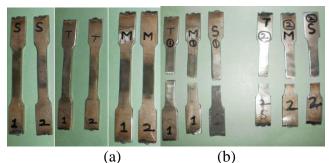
Tensile Specimens before Chemical exposure a) Sample before tensile test b) Sample after tensile test
